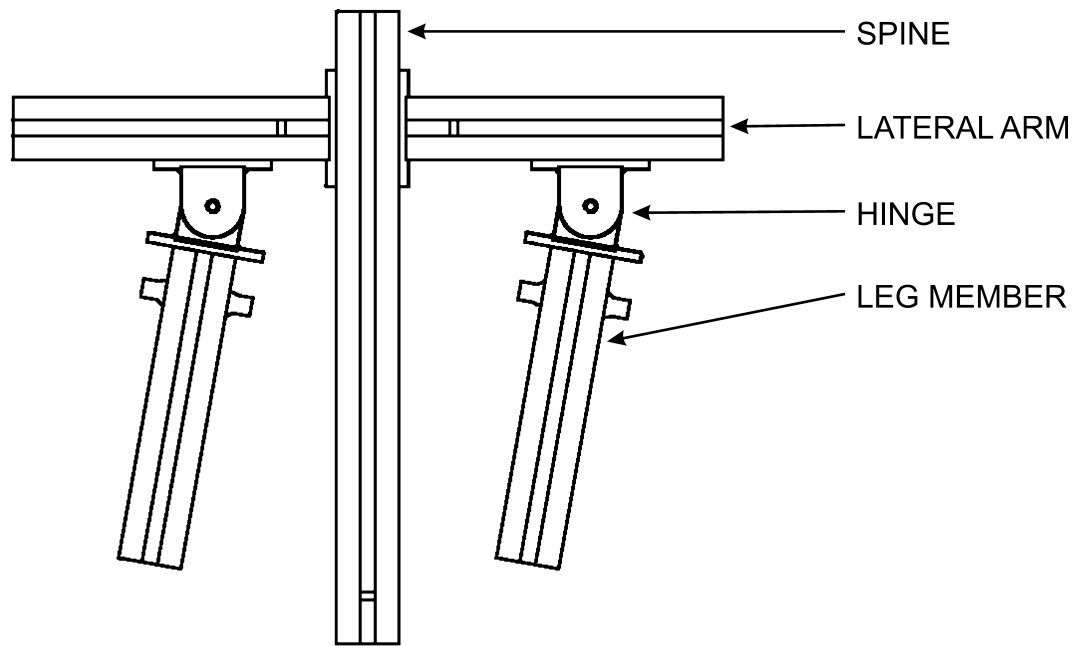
A drawing of the frame assembly from the second independent dynamic seat, showing the central spine (which supports the back support and weight-bearing saddle; and the lateral sub-assemblies, which support the leg supports.
